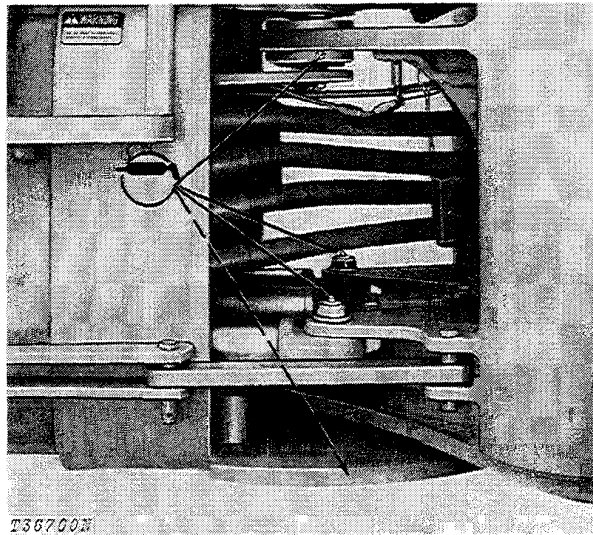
Steering Cylinder Front Pivot Pins (2 Points) and Frame Hinge Pivots (2 Points)
